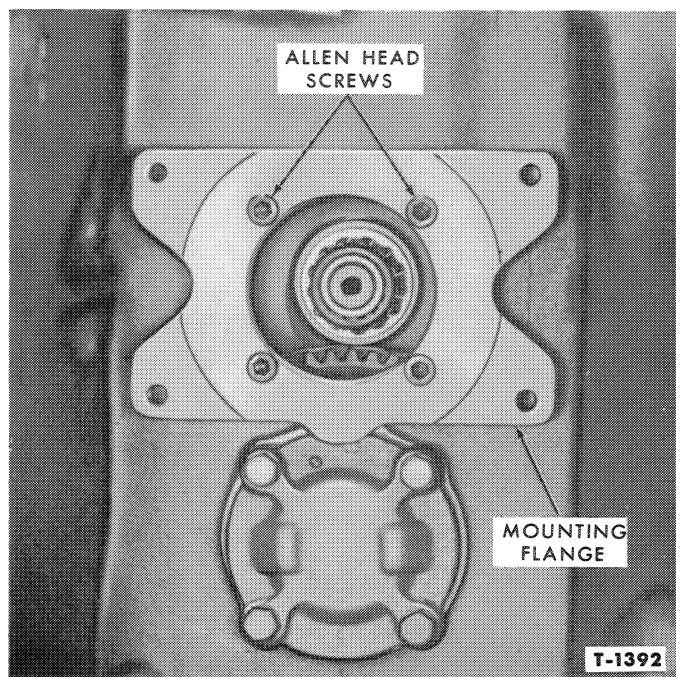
Mounting Flange Installed in Tractor Transmission Case
